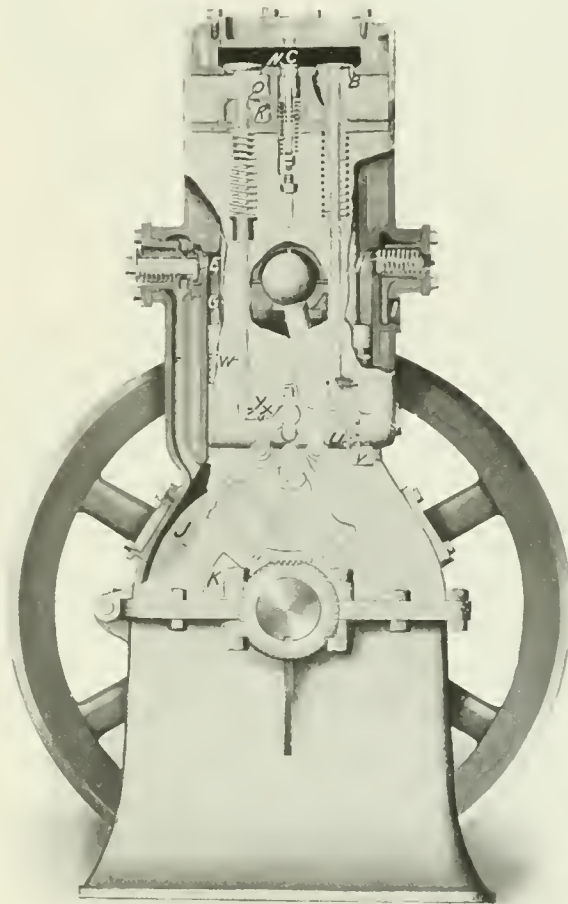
Side View showing Arrangement of Two-stage Compressor
